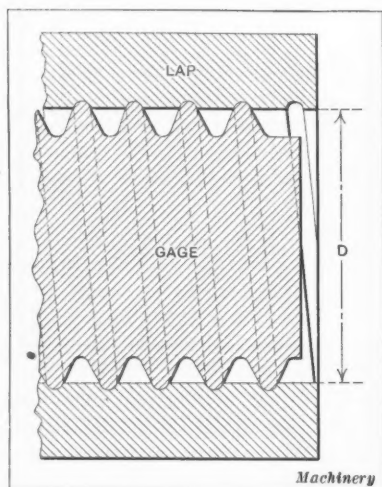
Diagram illustrating Type of Lap used for lapping Crest of Gage Thread
